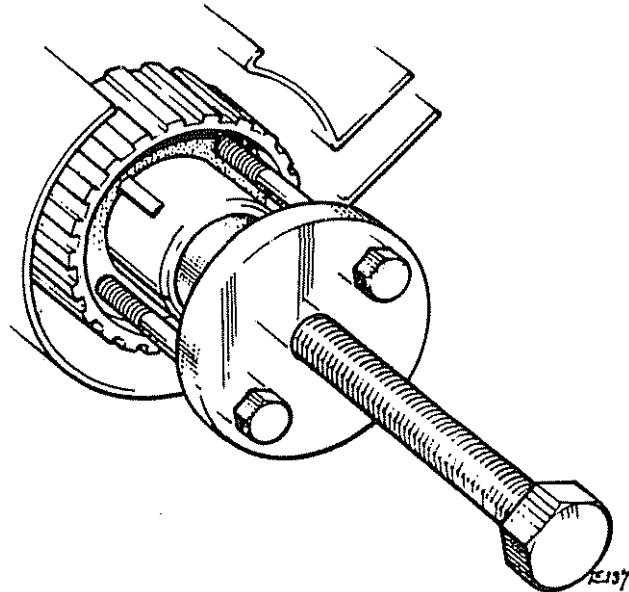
Using Tool '170A' to remove crankshaft sprocket
